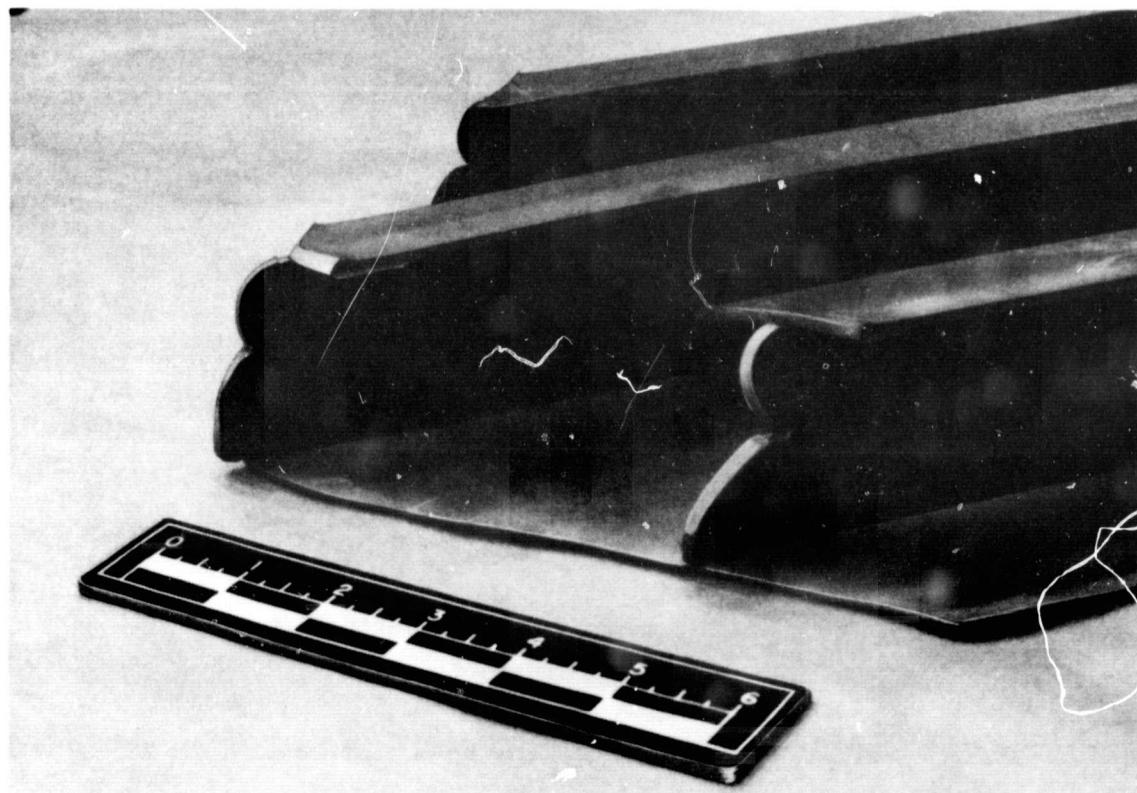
VIEW OF PACK A END CONFIGURATION
